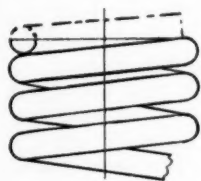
Sketch showing compression spring in which "the ends are closed and ground square."
